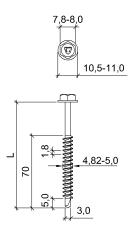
DB(A) 4.8 Screw for fixing in metal sheets
